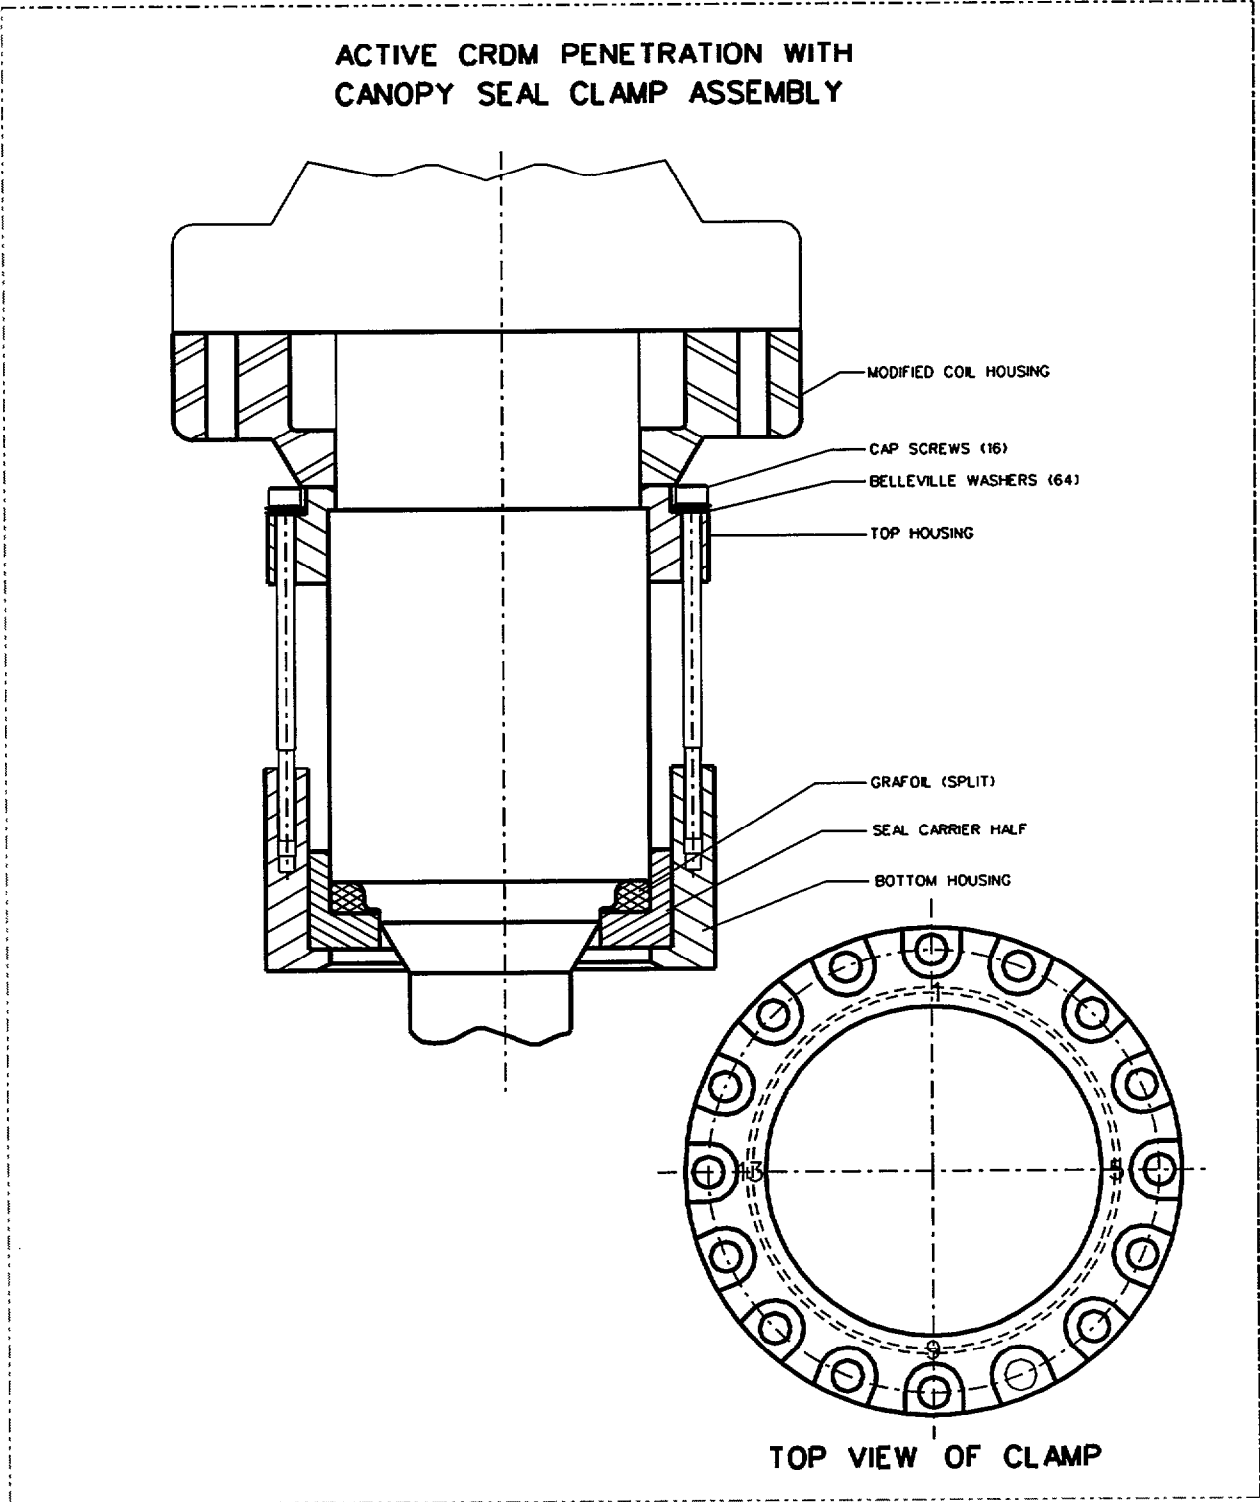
Typical Canopy Seal Clamp Assembly Cutaway
